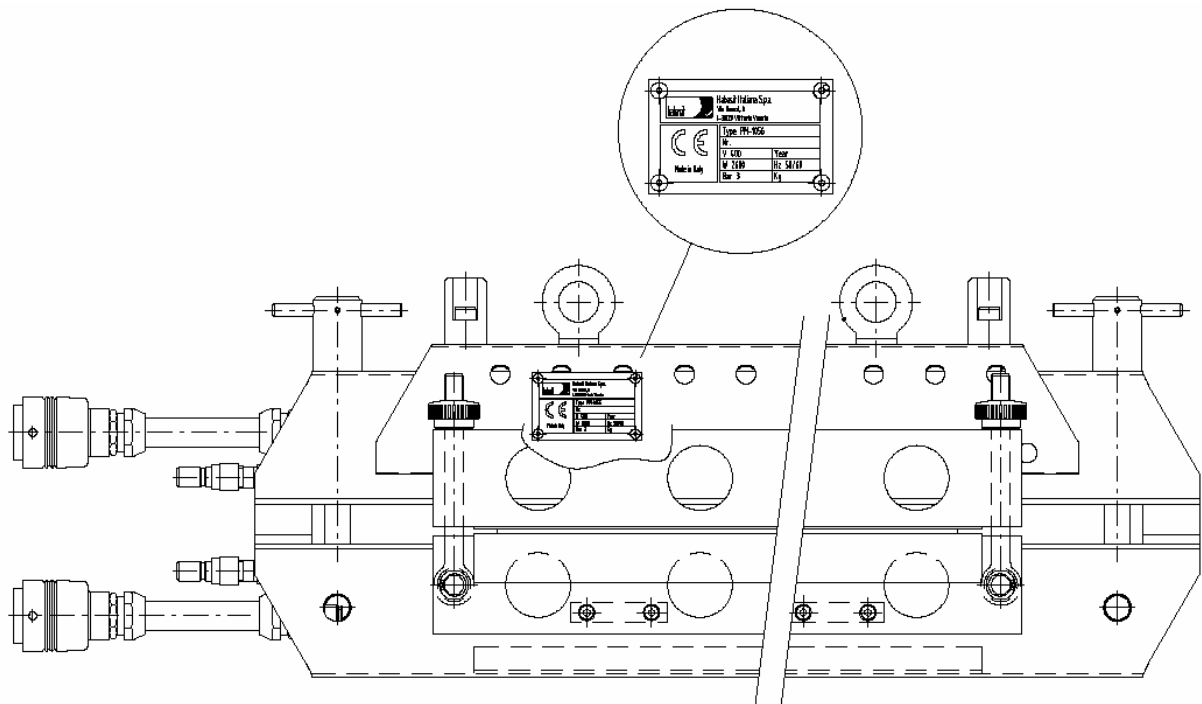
MACHINE IDENTIFICATION PLATE
